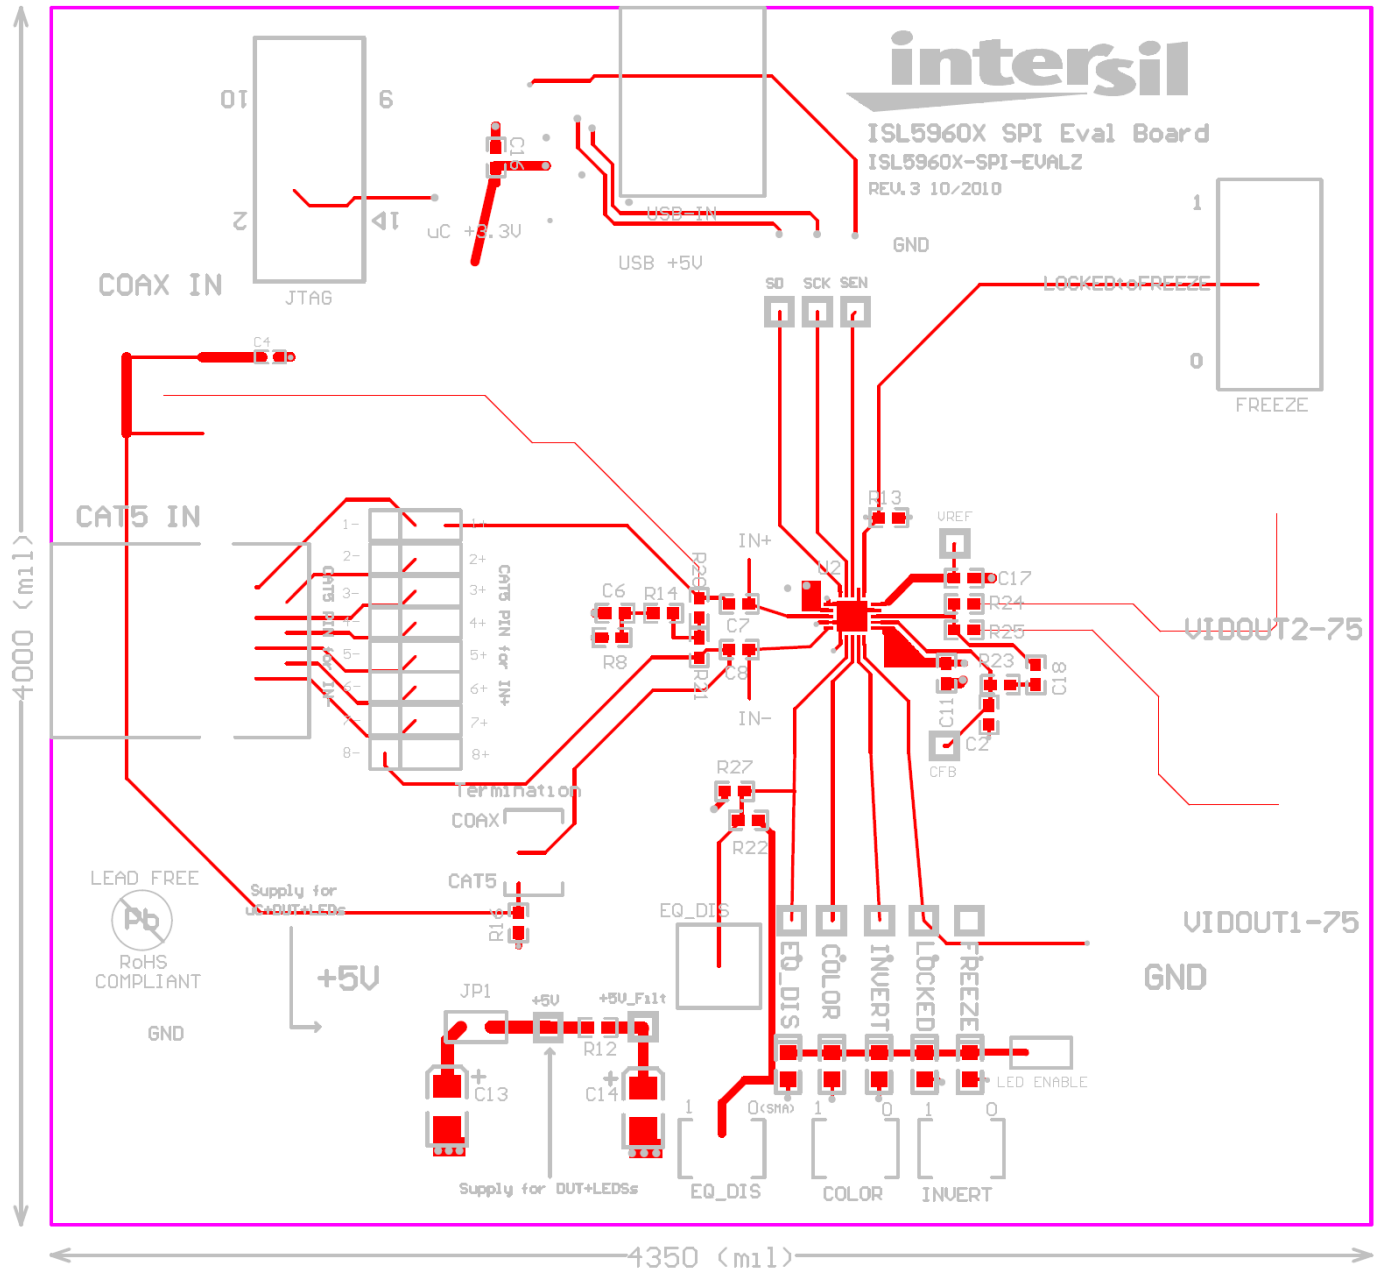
PCB TOP LAYER WITH SILKSCREEN
